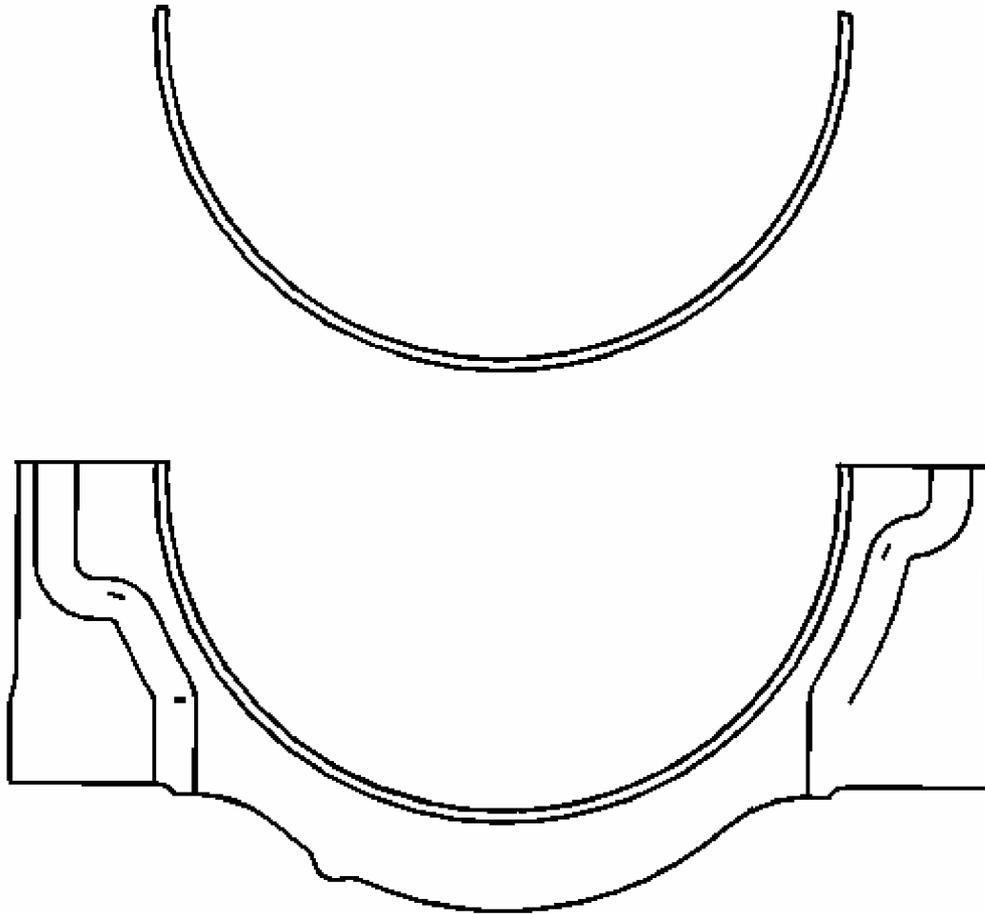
View Of Lower Connecting Rod Cap And Bearing
